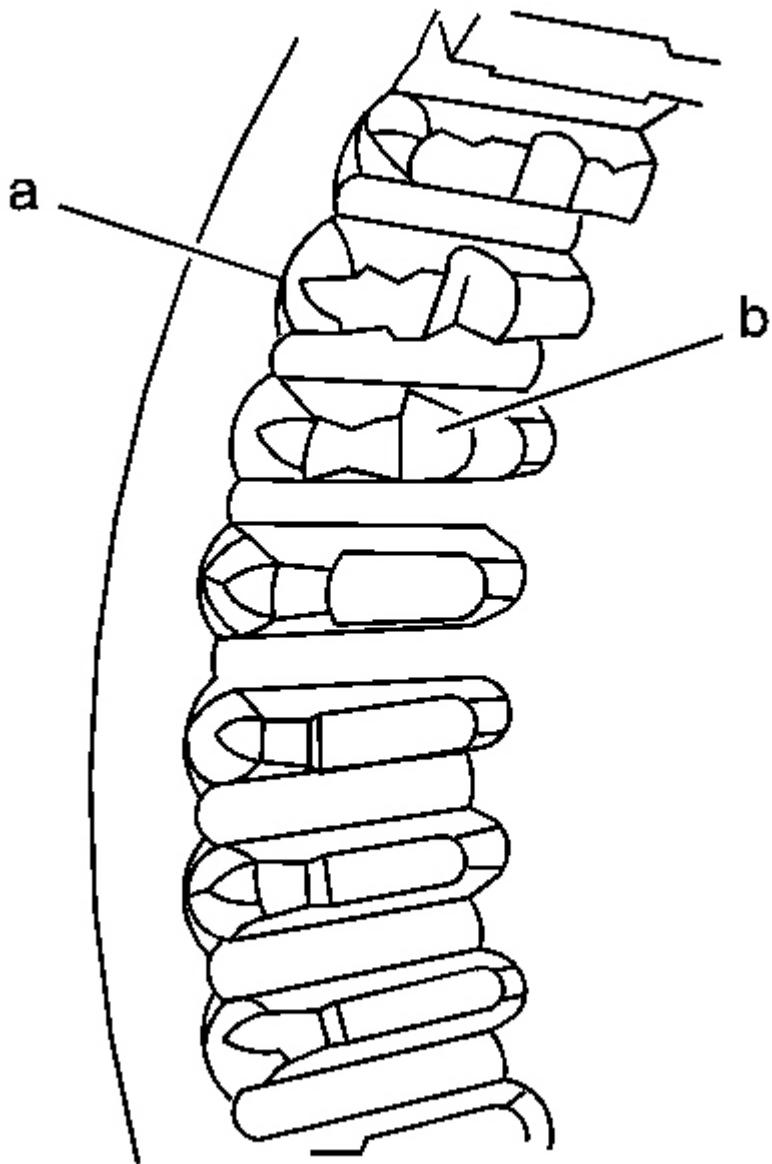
Identifying Damage On Synchronizer Sleeve Teeth
